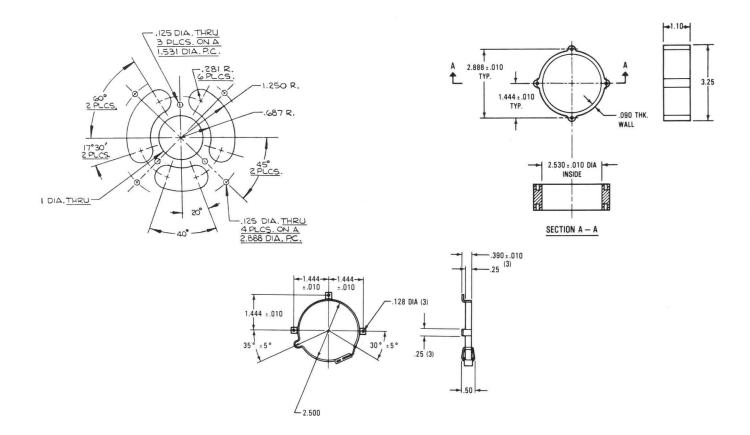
Mounting Plate, Chimney SK-1906 and Clamp SK-1916, for SK-1900 Socket Assembly
